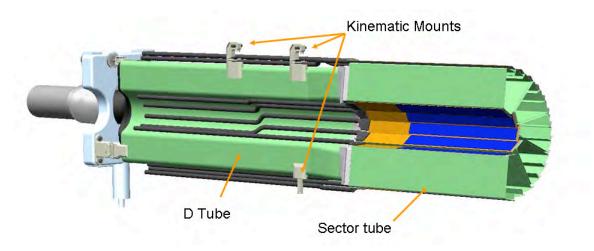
Half module consisting of 5 sector beam modules. The sector beam modules are secured to a carbon composite D tube using a dove tail structure which permits easy replacement of sector modules. Carbon composite parts are shown in green for greater visibility.
